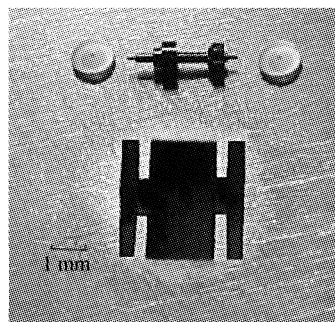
Photograph of the V-groove, bearings and pivoting axis
